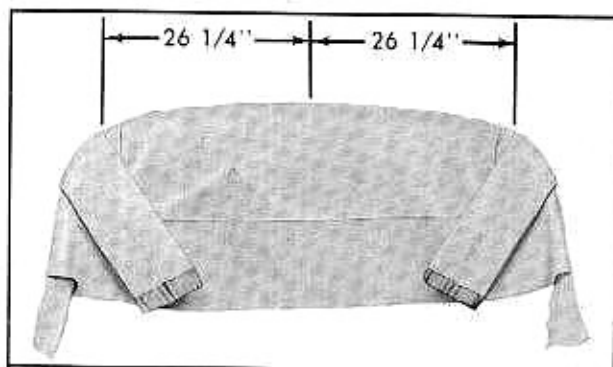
Tacking Rear Quarter Stay Pads to Trim Stick
